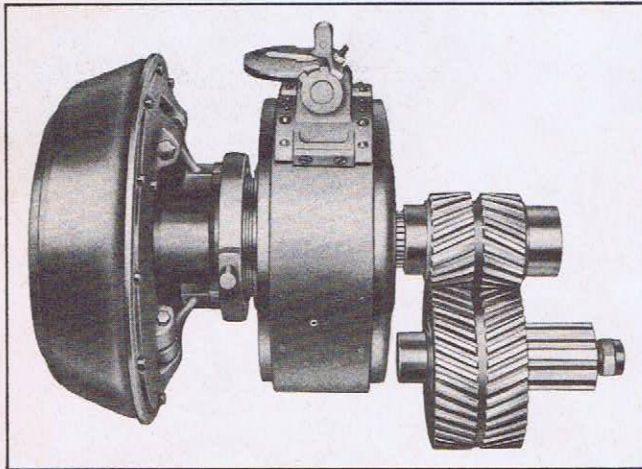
POWER FLOW REVERSE DRIVE OF TYPE "B" REVERSE GEAR.
